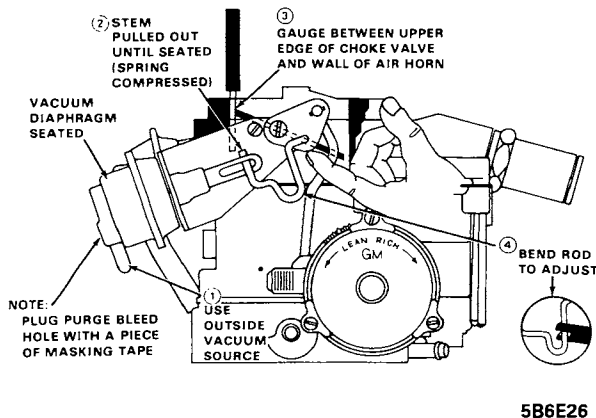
E-26 - Auxiliary Vacuum Break Adjustment
